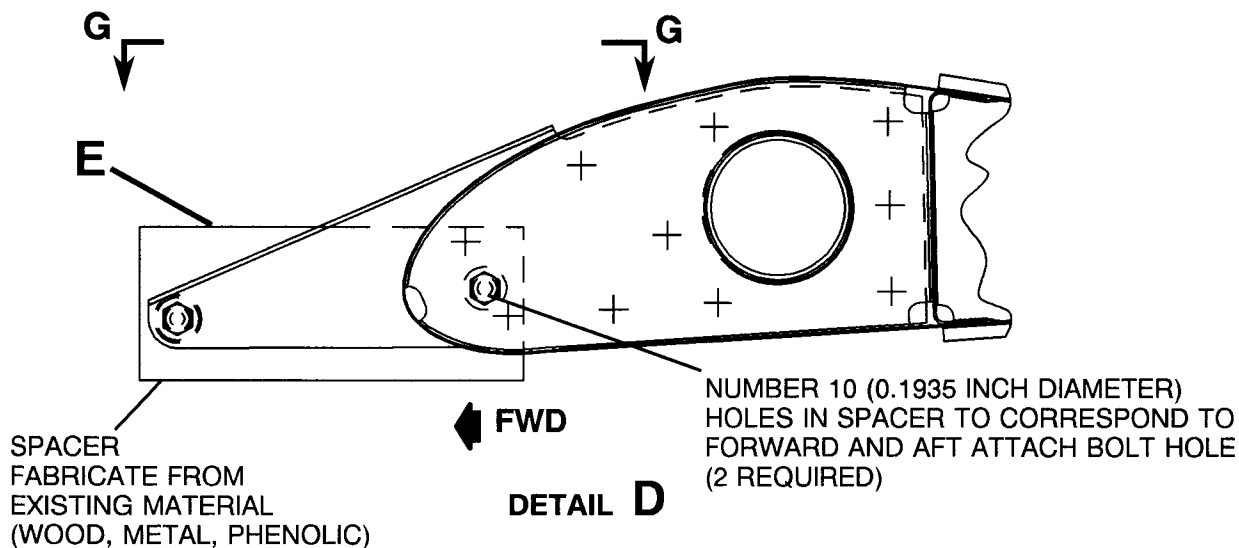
Flap Support Rib Assembly and Roller Bearing Replacement (Sheet 9)
